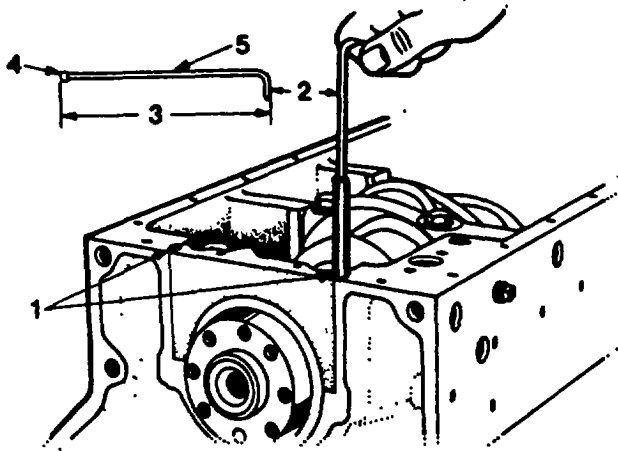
Installing Rear Main Bearing Cap Side Oil Seals
